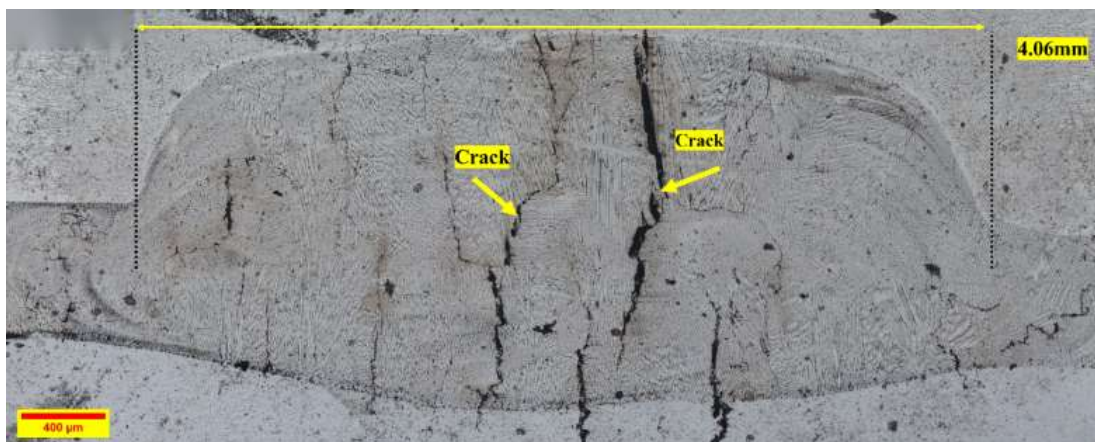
Weld nugget in a dissimilar joint of MSS420 to ASS304 using a HEA interlayer and welding current of 7 kA.
